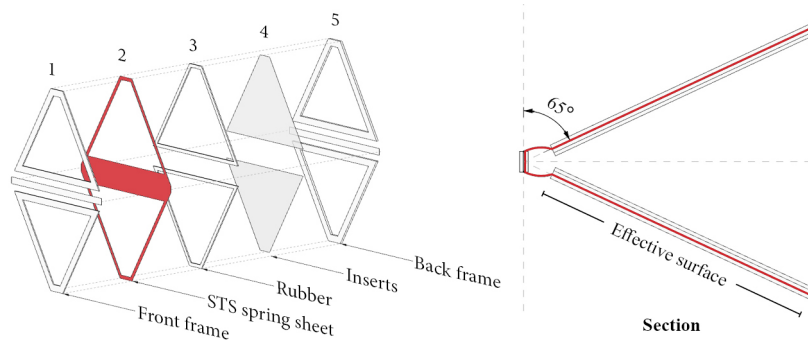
Elastomeric layered panel with Spring metal sheet exploded drawing & section
